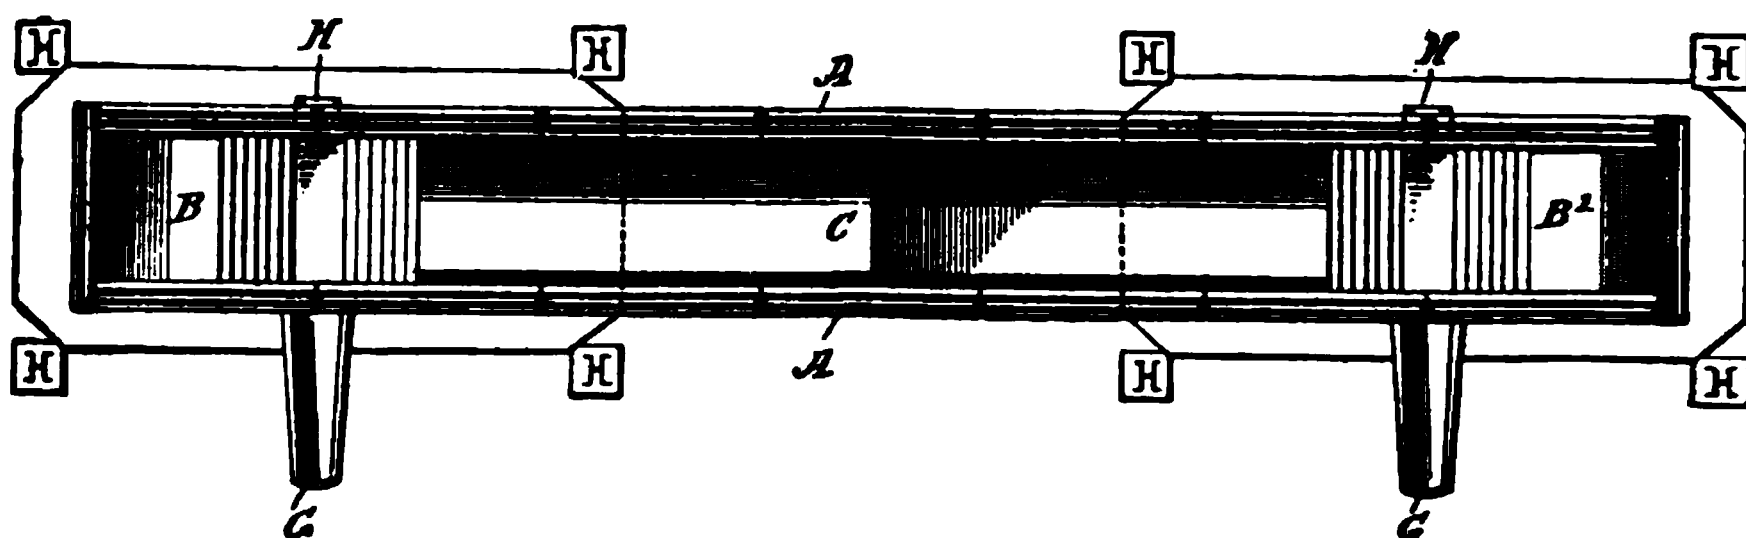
Washoe blast-furnace — sectional plan on line 4-4 of Fig. 53
